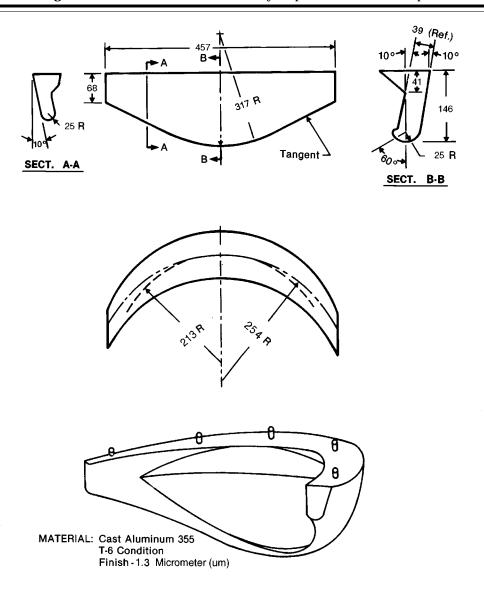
A.—Diagram of Bead Unseating Block—Dimensions in millimeters (mm)
